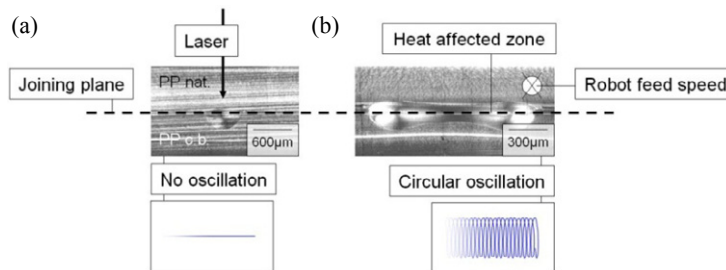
Weld seam cross sections manufactured by conventional contour welding without beam oscillation (a) as well as contour welding with part adapted temperature fields using circular beam oscillation (b)
